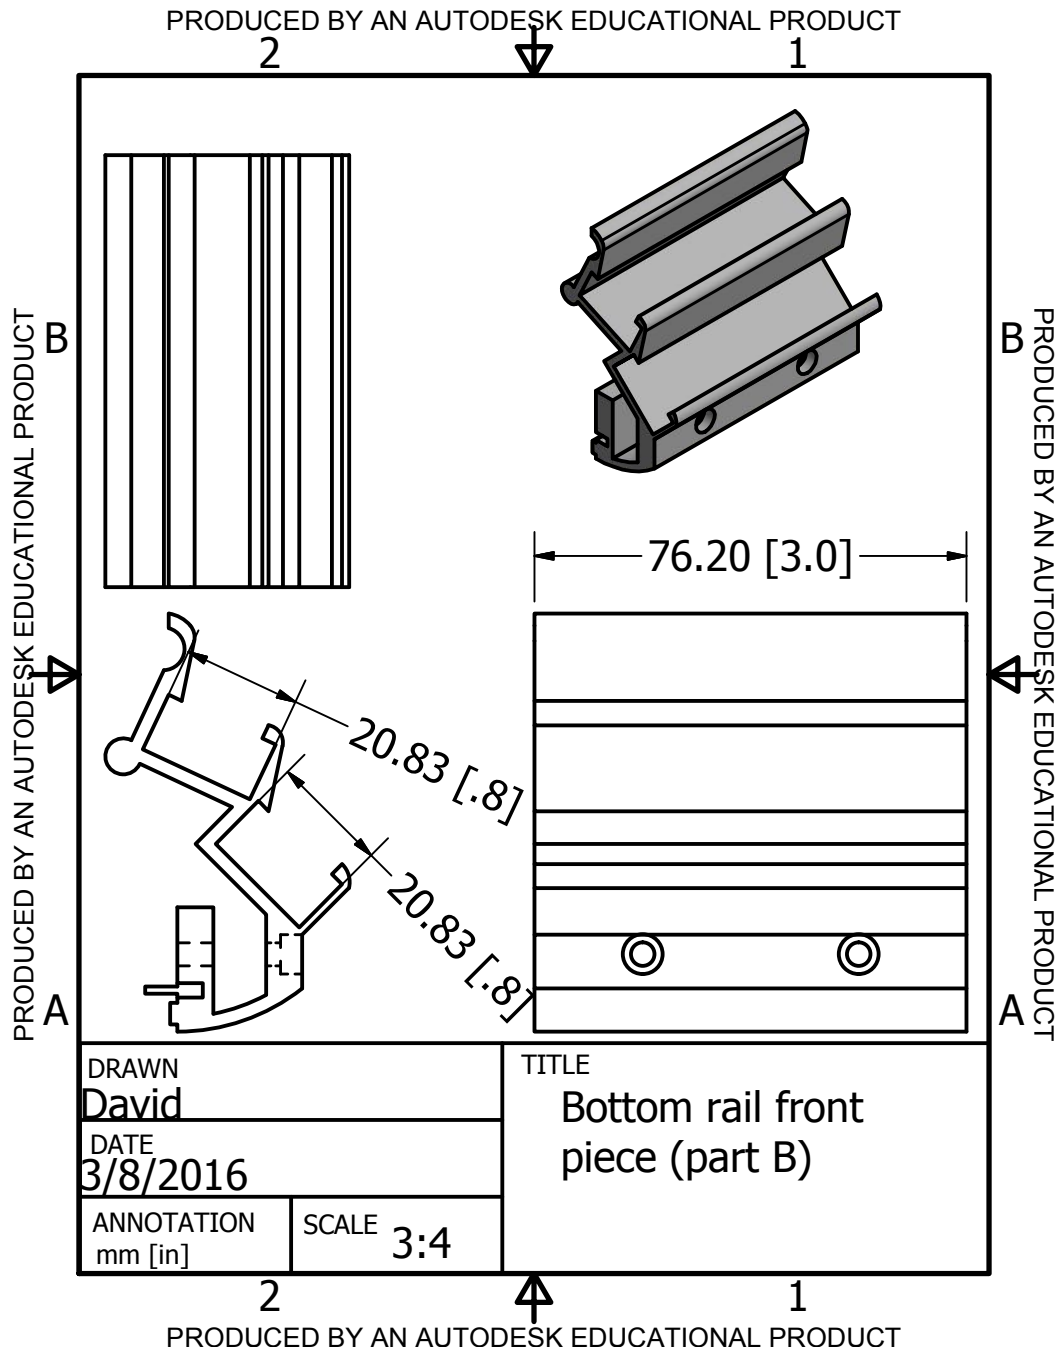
Mechanical drawing for the front piece of the bottom rail.
